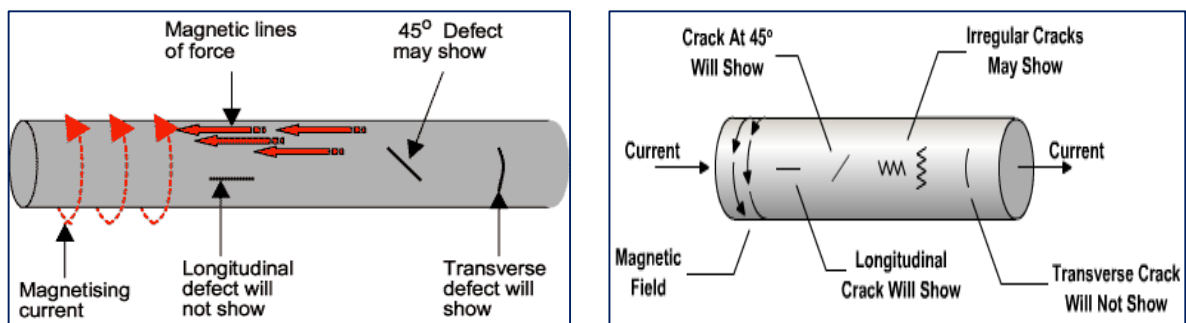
Magnetic Particle Testing for Different Cracks [99] [100]
